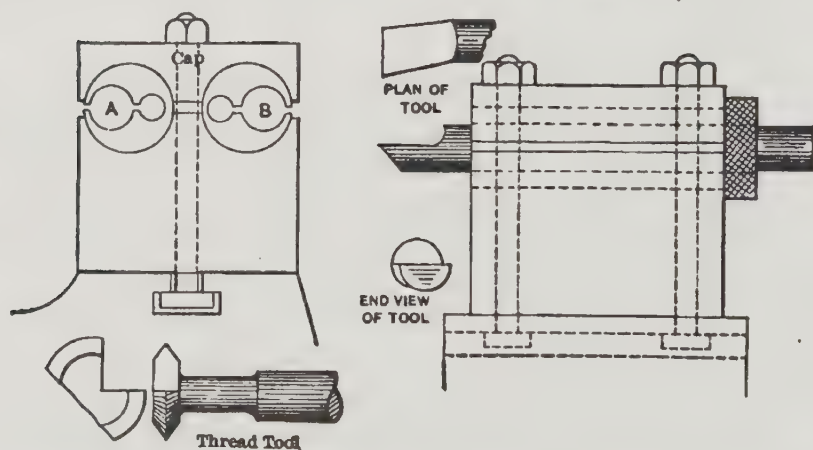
Boring Tool Holder and Type of Inside Threading Tool.
